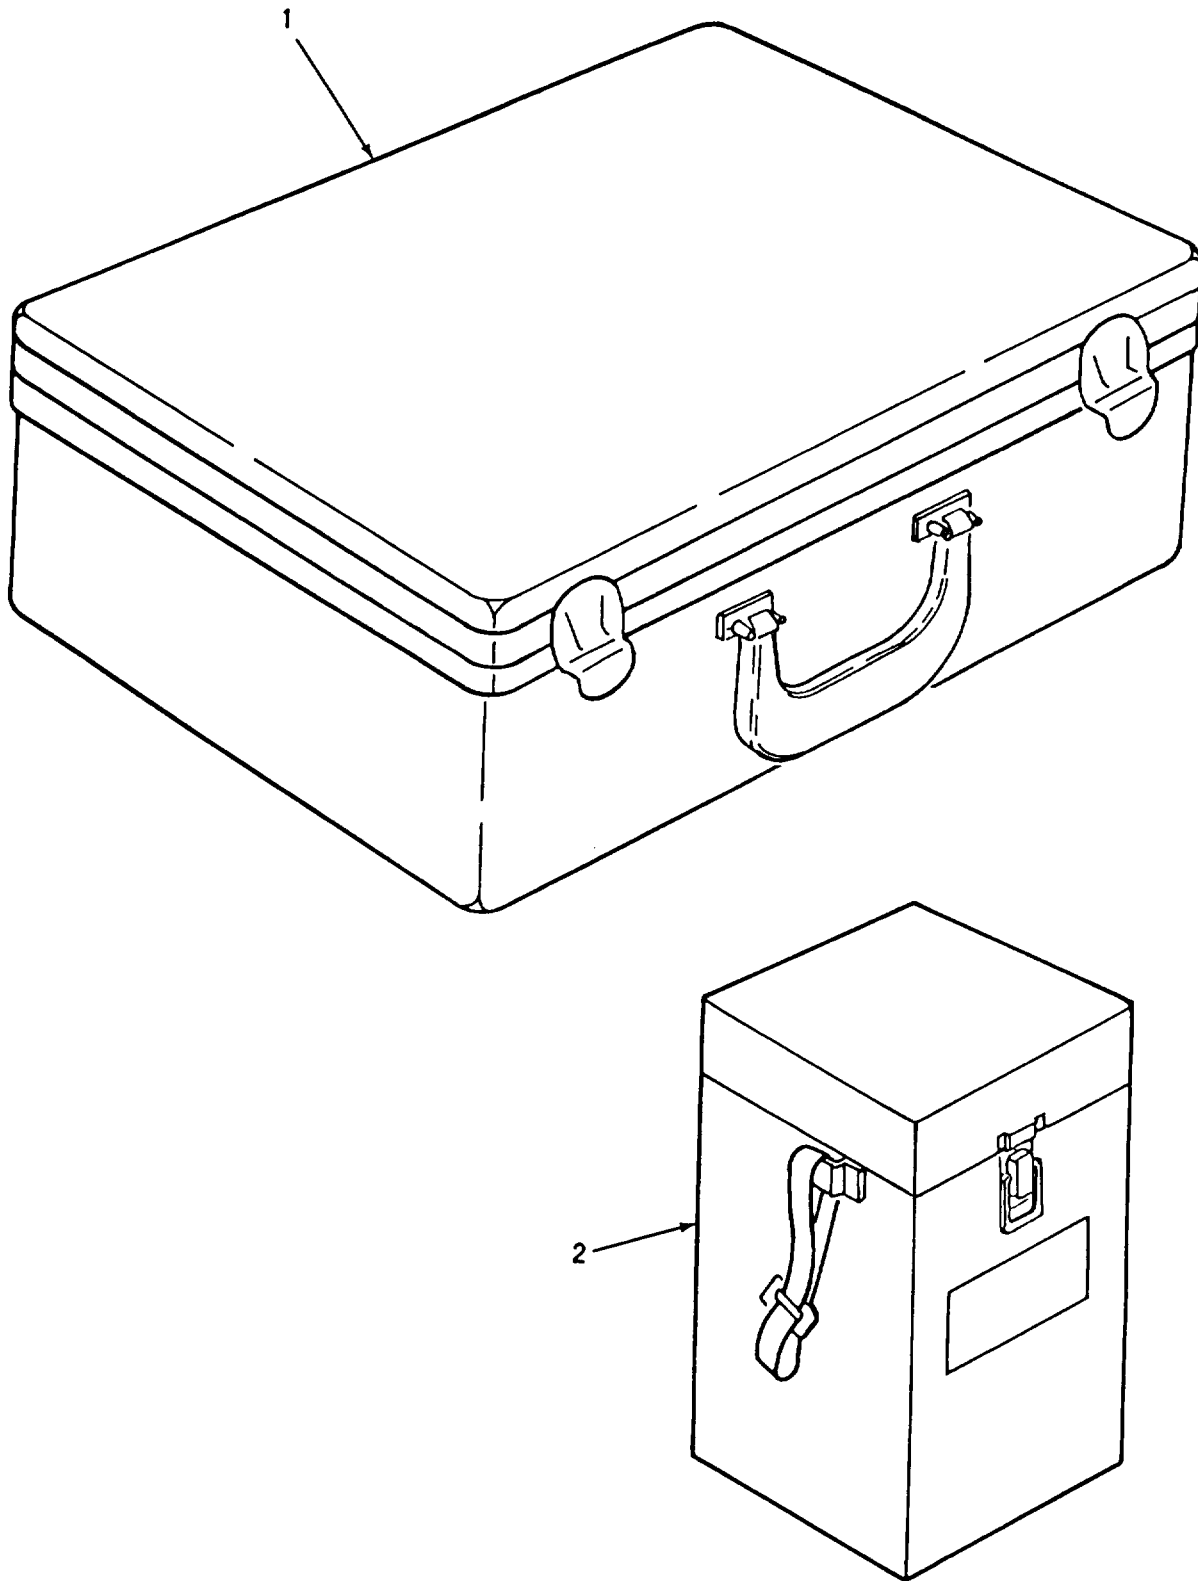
Fuel System Icing Inhibitor Kit And Petroleum Sampling and Gaging Kit
